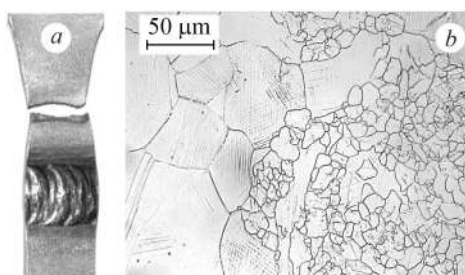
Fracture (a) and recrystallization zone near the cracking line (b) obtained in a static tensile test of the 1.4539 steel welded joint made with the TIG method.
